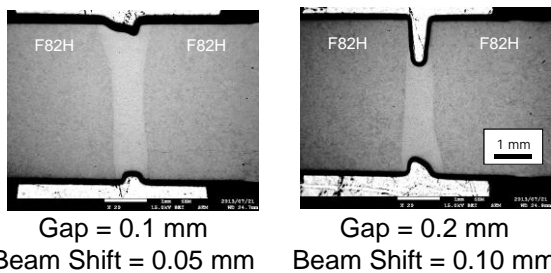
Microstructural images of penetration obtained by butt welding with gap.
